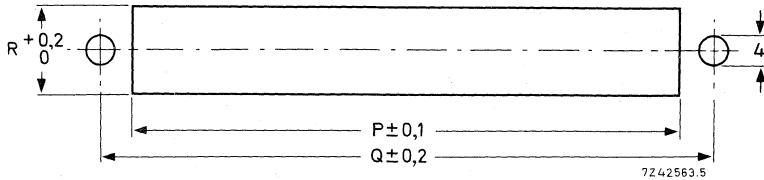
Piercing diagram for panel mounting; see Table 3 for dimensions P, Q and R. If bracket 4332 026 04630 and end piece 4332 026 04770 are used the circular holes are superfluous.
